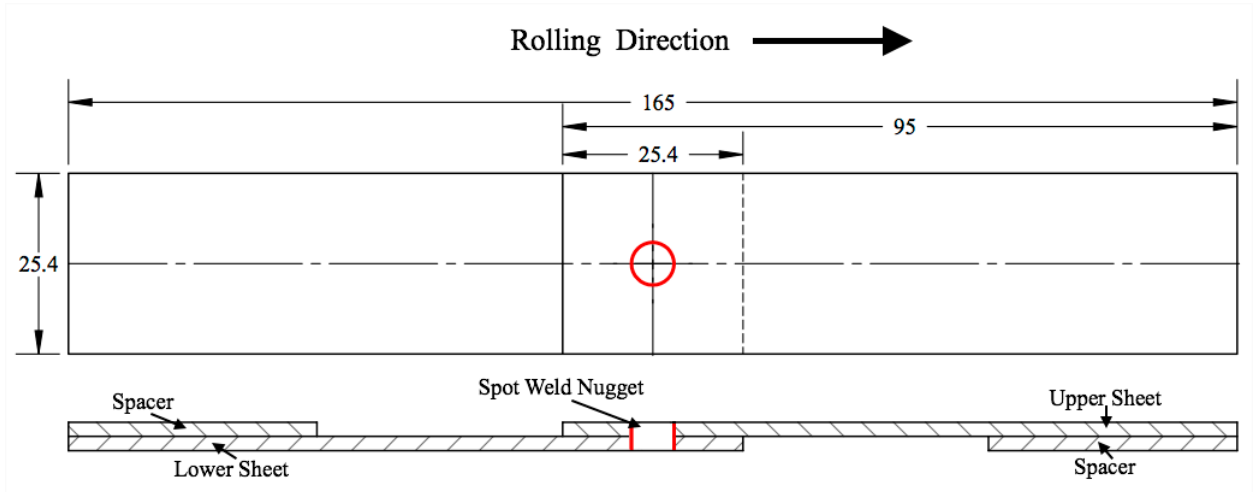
Lap-shear spot welded specimen design.
